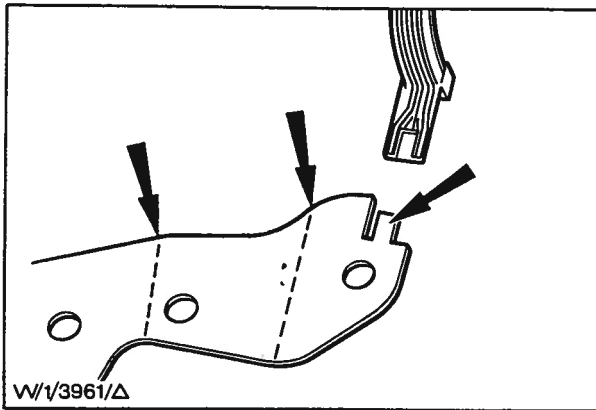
Oil Pan Front Seal and Gasket Installation - 2728T Engine
